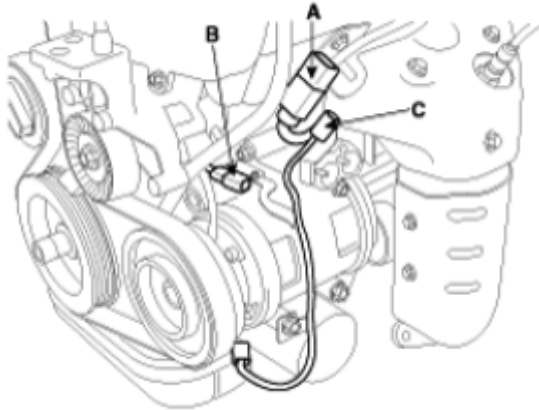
Identifying Oil Pressure Sensor, Air Conditioner Compressor Switch And Oxygen Sensor (Front 1st) Connector
